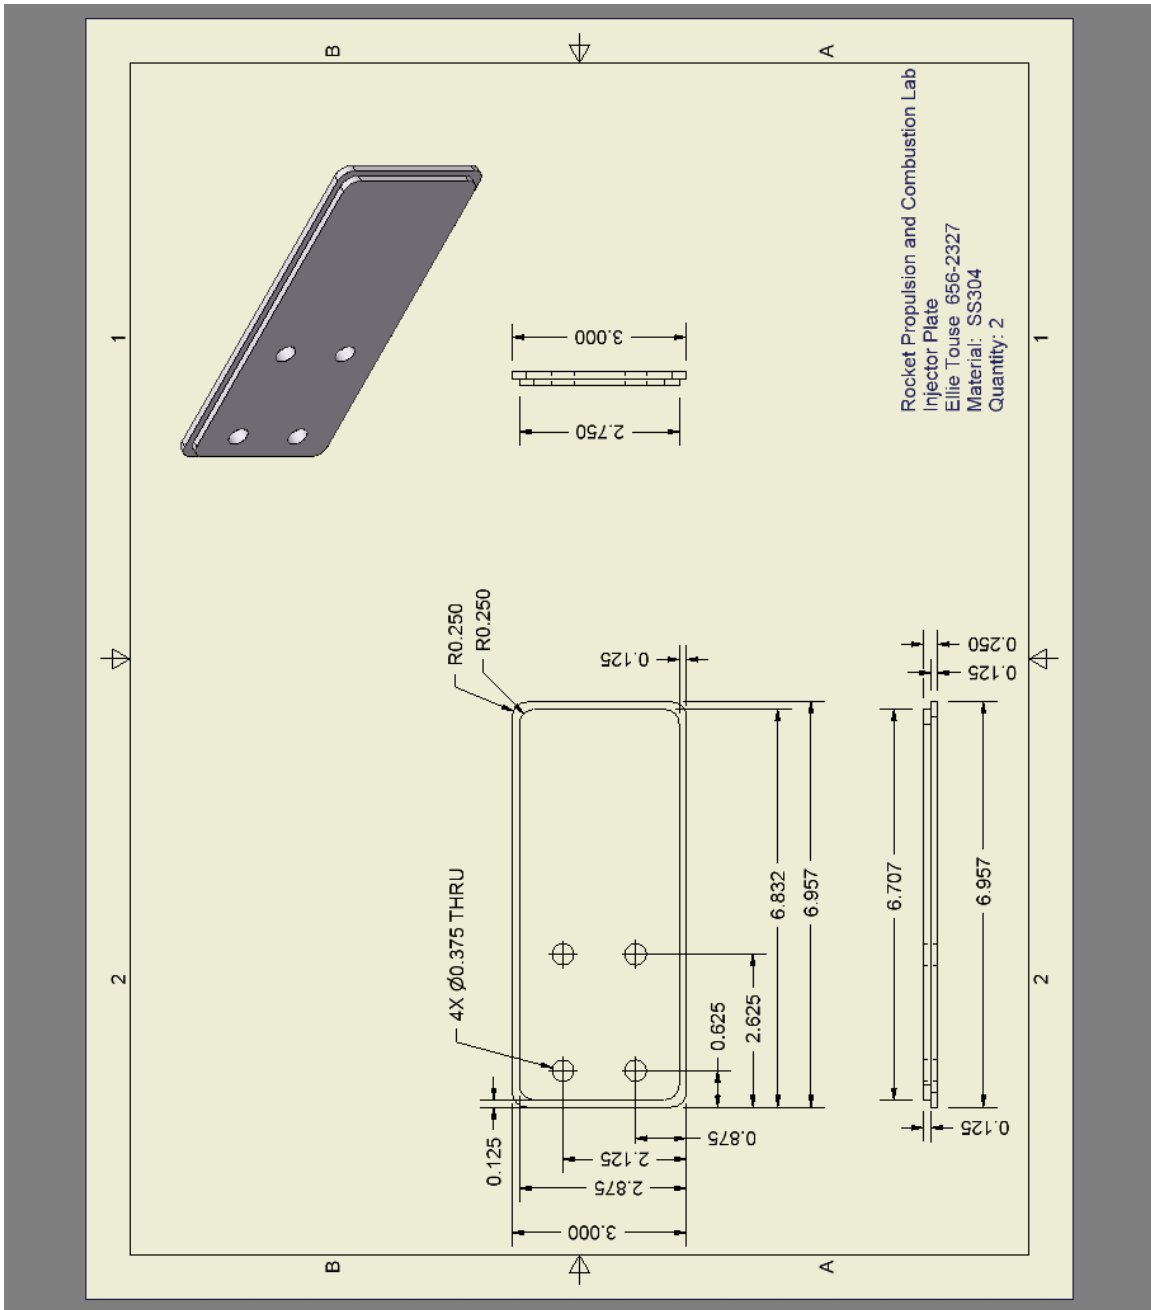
Injector Plate for Two-Dimensional Test Section, Modified to Accommodate 5-degree Wedge
